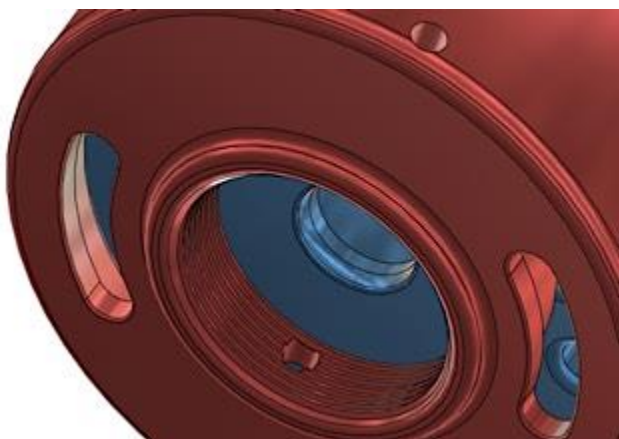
(left): Aft end of a drill head with receptacles for the threaded coupler and forward pins.
